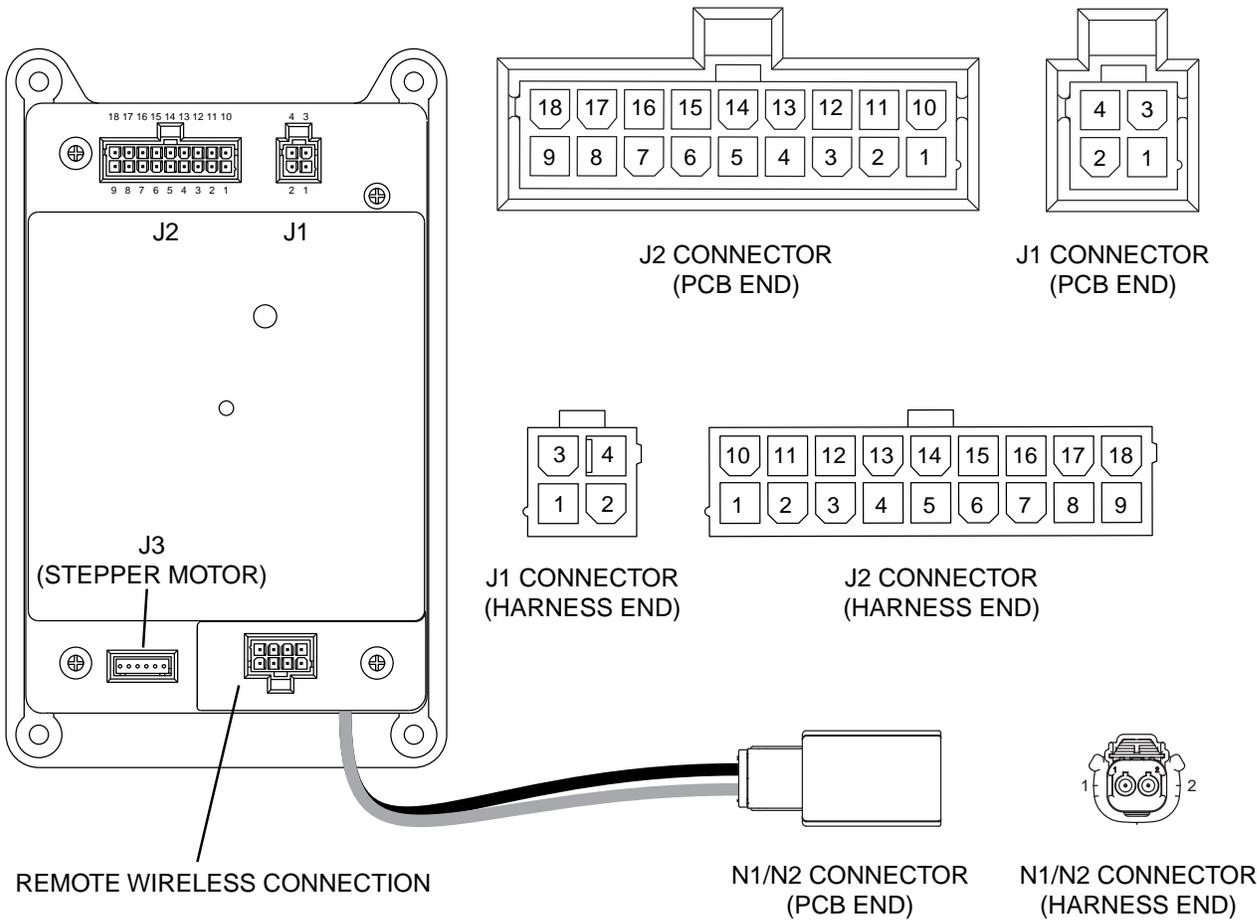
10 kW Printed Circuit Board and J1 Connector
